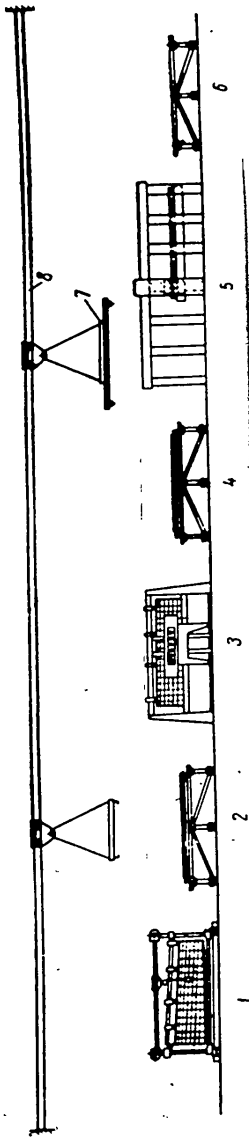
Assembly of a Wing Panel by the Continuous Production Method
